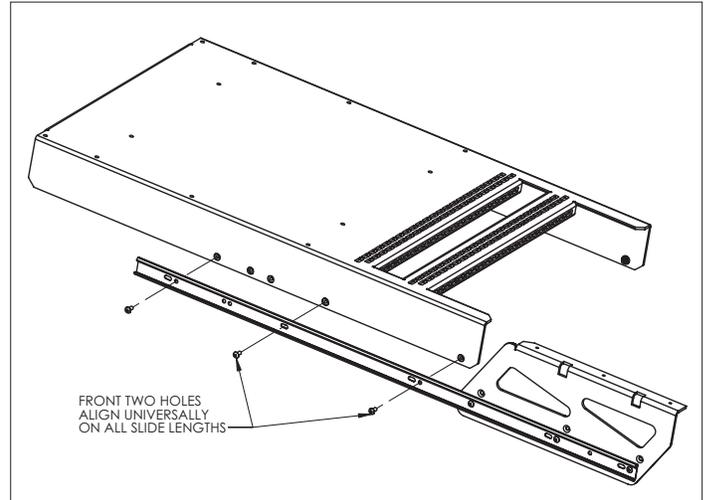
Figure A. Shown here, 30" slide kit (Part # 310 113 411).
